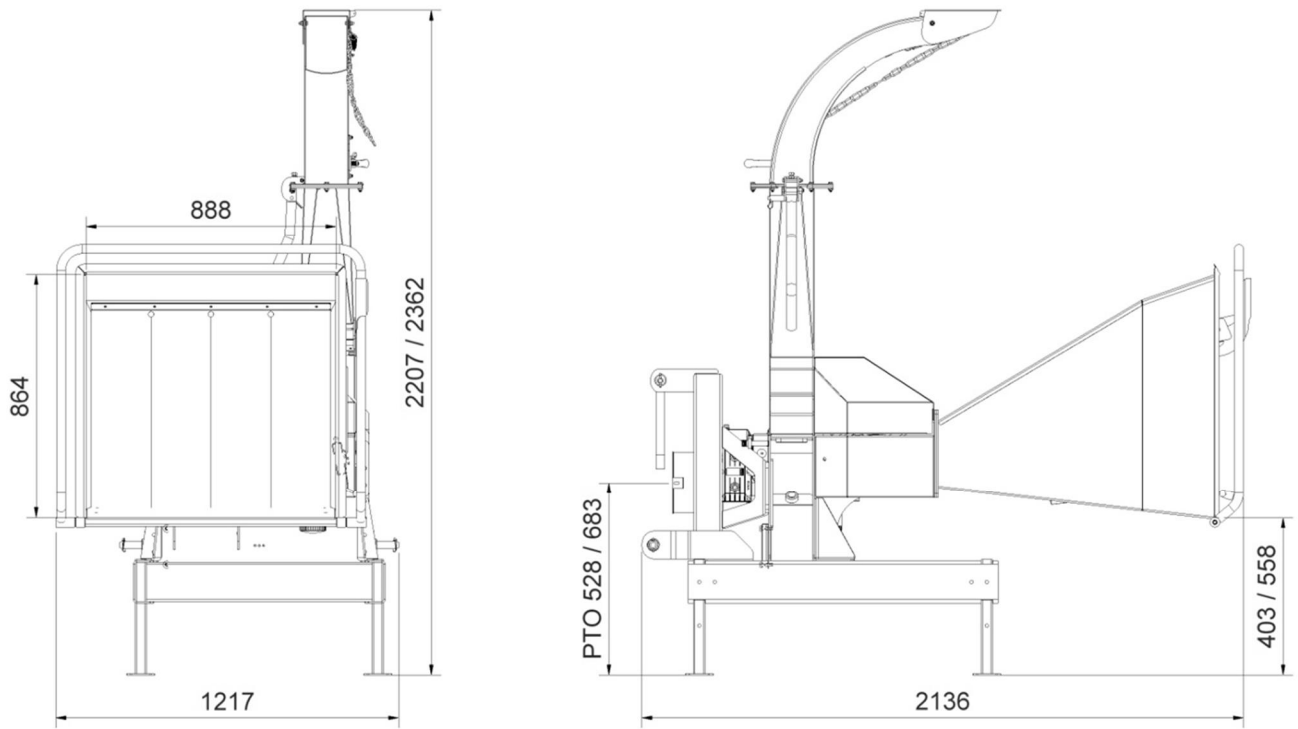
Dimensional drawing for TP 130 PTO with fixed funnel
